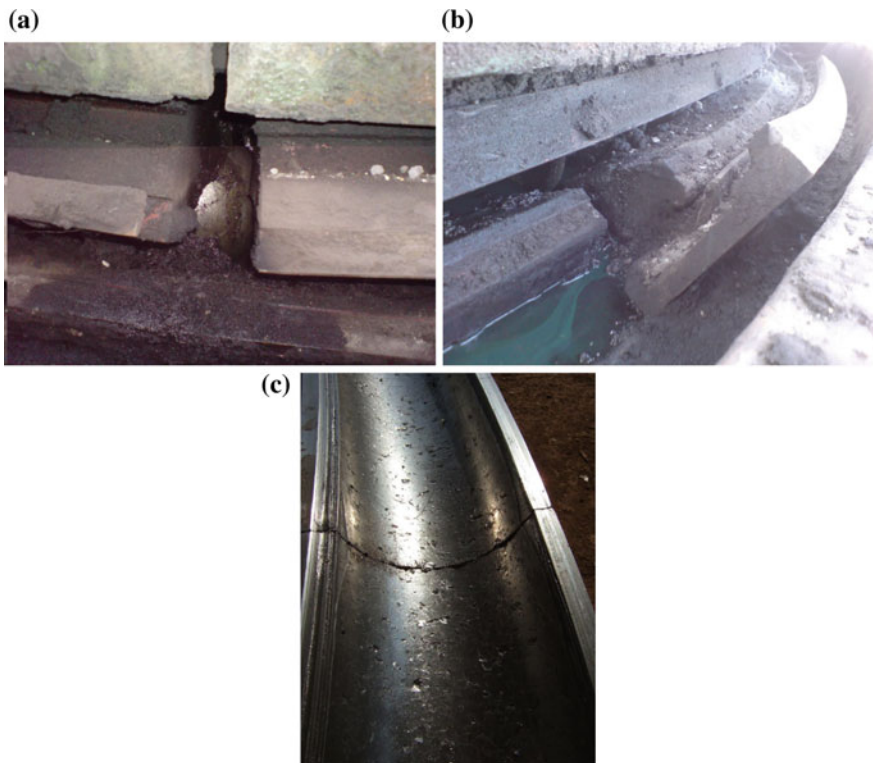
Damage to the superstructure slewing bearing of surface mining machines: a, b plastic deformation of the bottom raceway; c pitting
